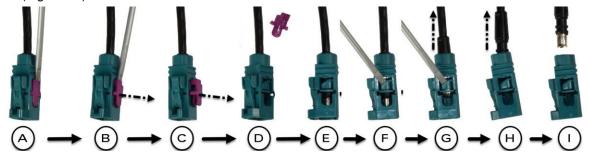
Remove coaxial wire from single Fakra connector. Lift locking pin (A, B, and C). Locking pin removed (D and E). Lift primary locking tab (F). With primary locking tab lifted, pull coaxial wiring from Fakra housing (G). Remove coaxial wiring from Fakra housing (H and I).
